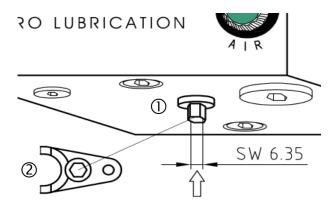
Vent screw ① on underside of metering block – tool ② with hex socket
